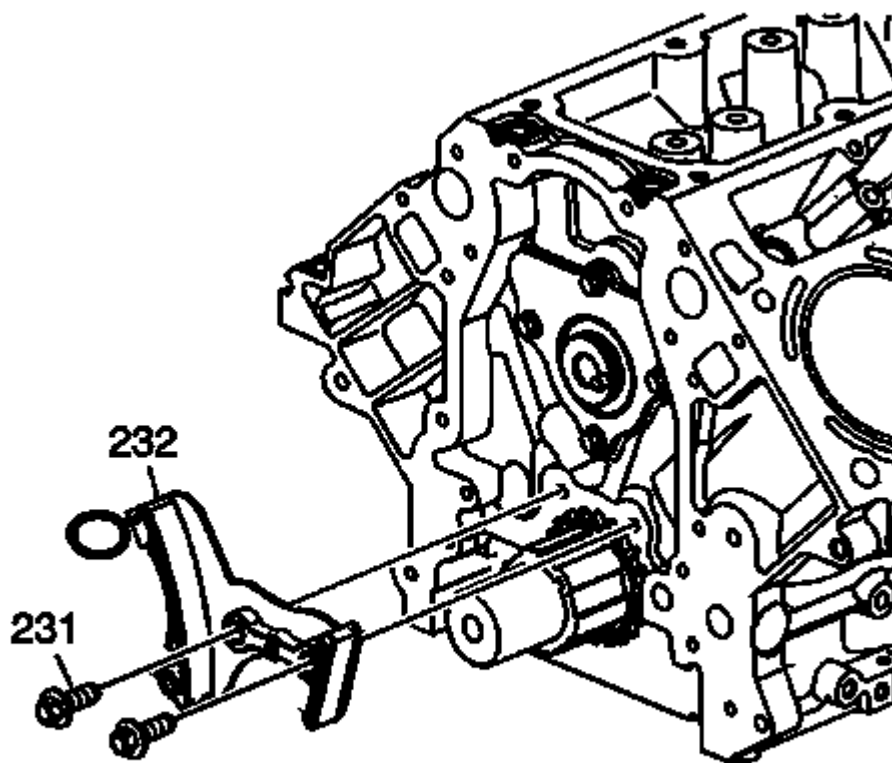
View Of Oil Level Indicator Tube O-Ring
